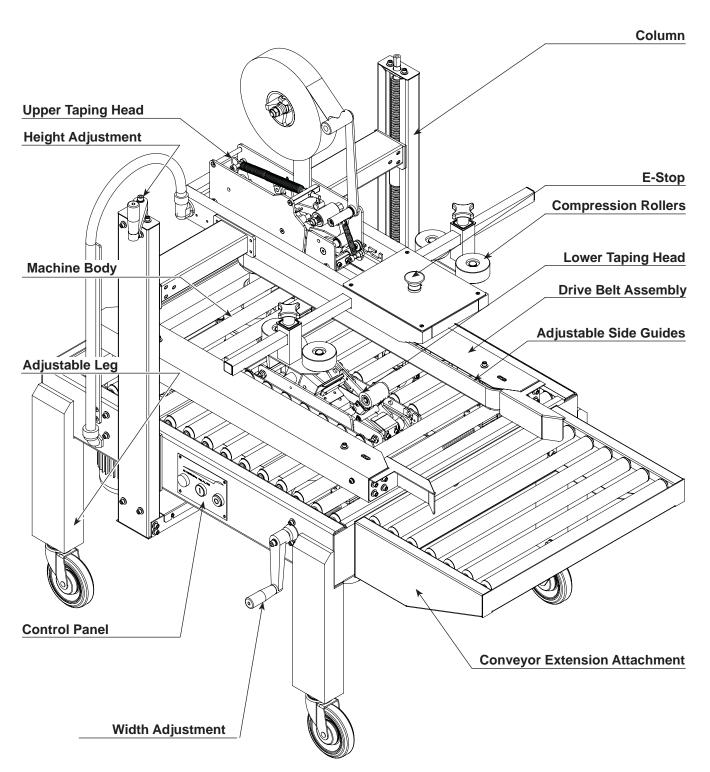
a88-I Case Sealer Components (Left Front View)
